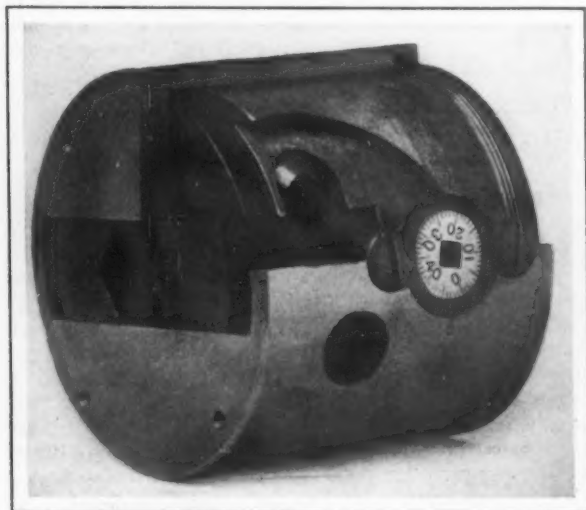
A View of the Chuck with a Portion of the Outer Casing Removed to Show the Construction
